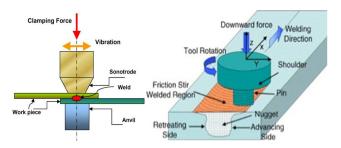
Ultrasonic welding vs. friction stir welding. [10]
